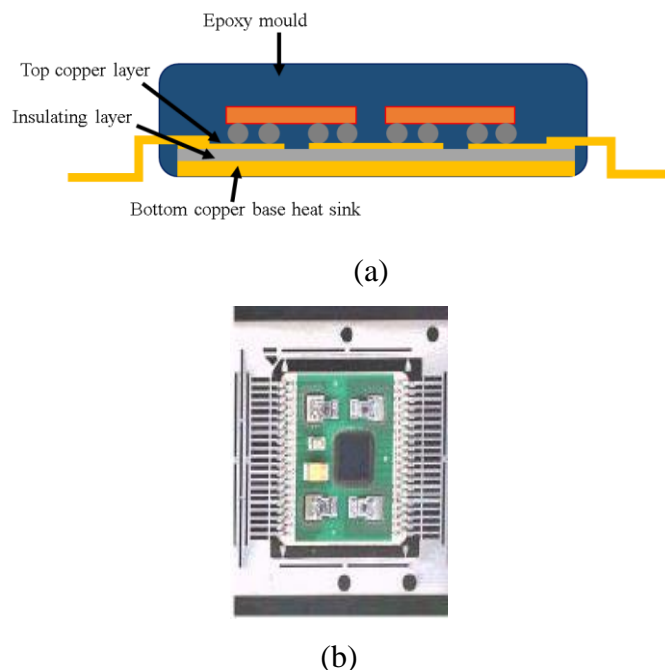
Flip chip power module(a) cross sectional schematic view (b) Detailed view[25]
